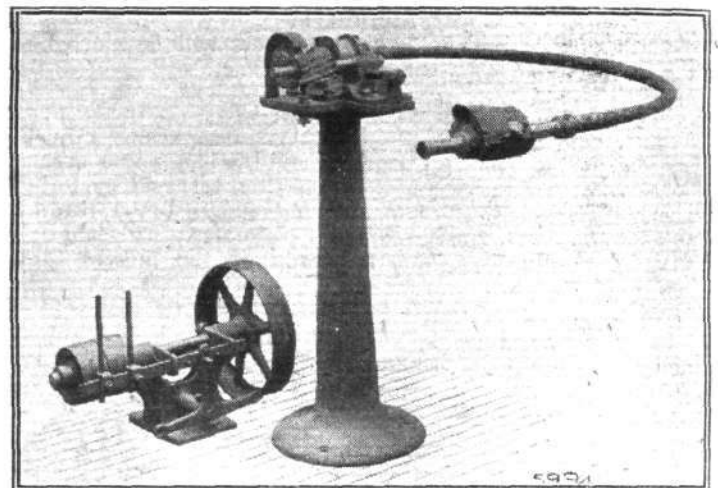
The Flexible shaft drive. Emery wheel for sharpening cutter mounted on standard.
